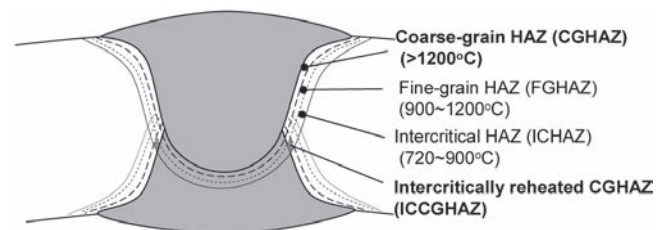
Schematic illustration of a seam welded joint of UOE linepipe.
